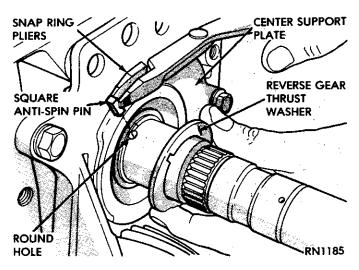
Removing/Installing Reverse Gear Thrust Washer And Anti-Spin Pin
